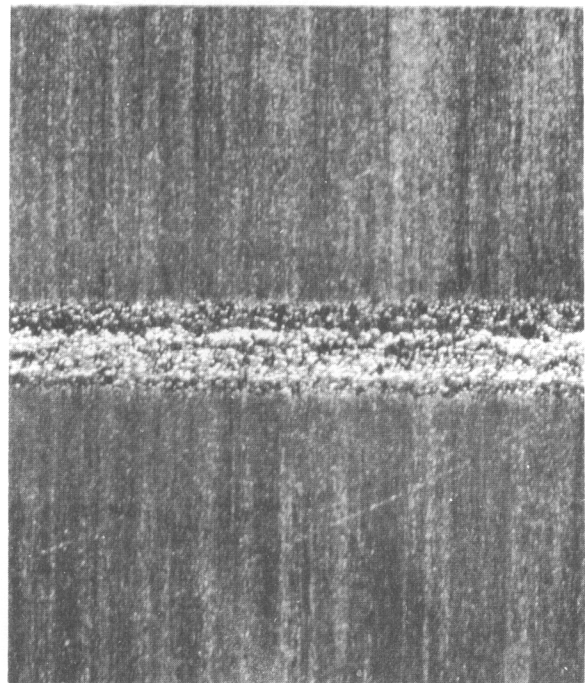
Trial Weld Bead; X20; 0.005-in.
